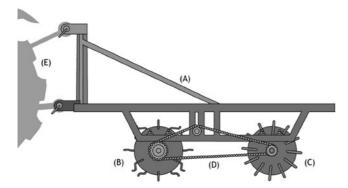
Schematic drawing of the rolling harrow: (A) frame; (B) front axle with spike discs; (C) rear axle with cage rolls; (D) chain drive and (E) three-point hitch.
